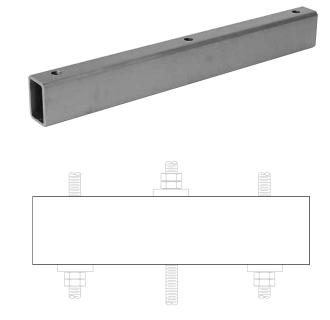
DIMENSIONS (IN) • WEIGHT (LBS)
